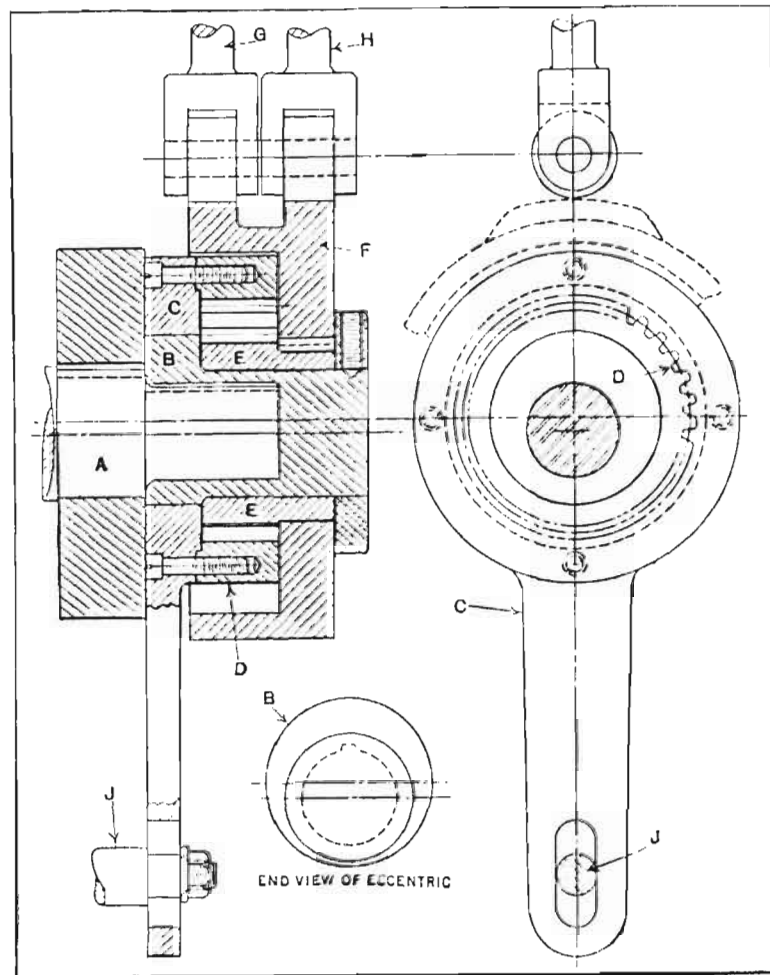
Compact Speed-reducing Gearing for Operating Press Fixture
